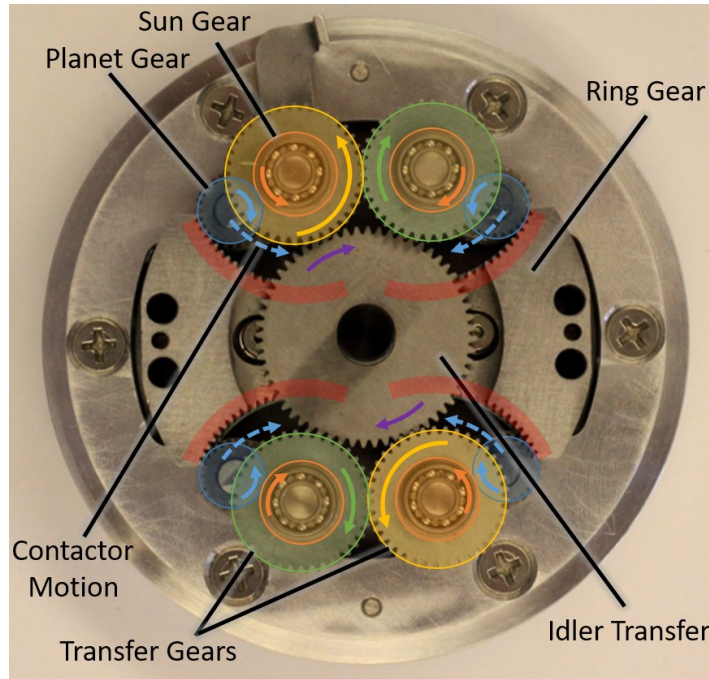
Contactor drive gearing system. Transfer gears make all contactors move simultaneously, and planetary gearing increases stiffness of contactor positioning.
